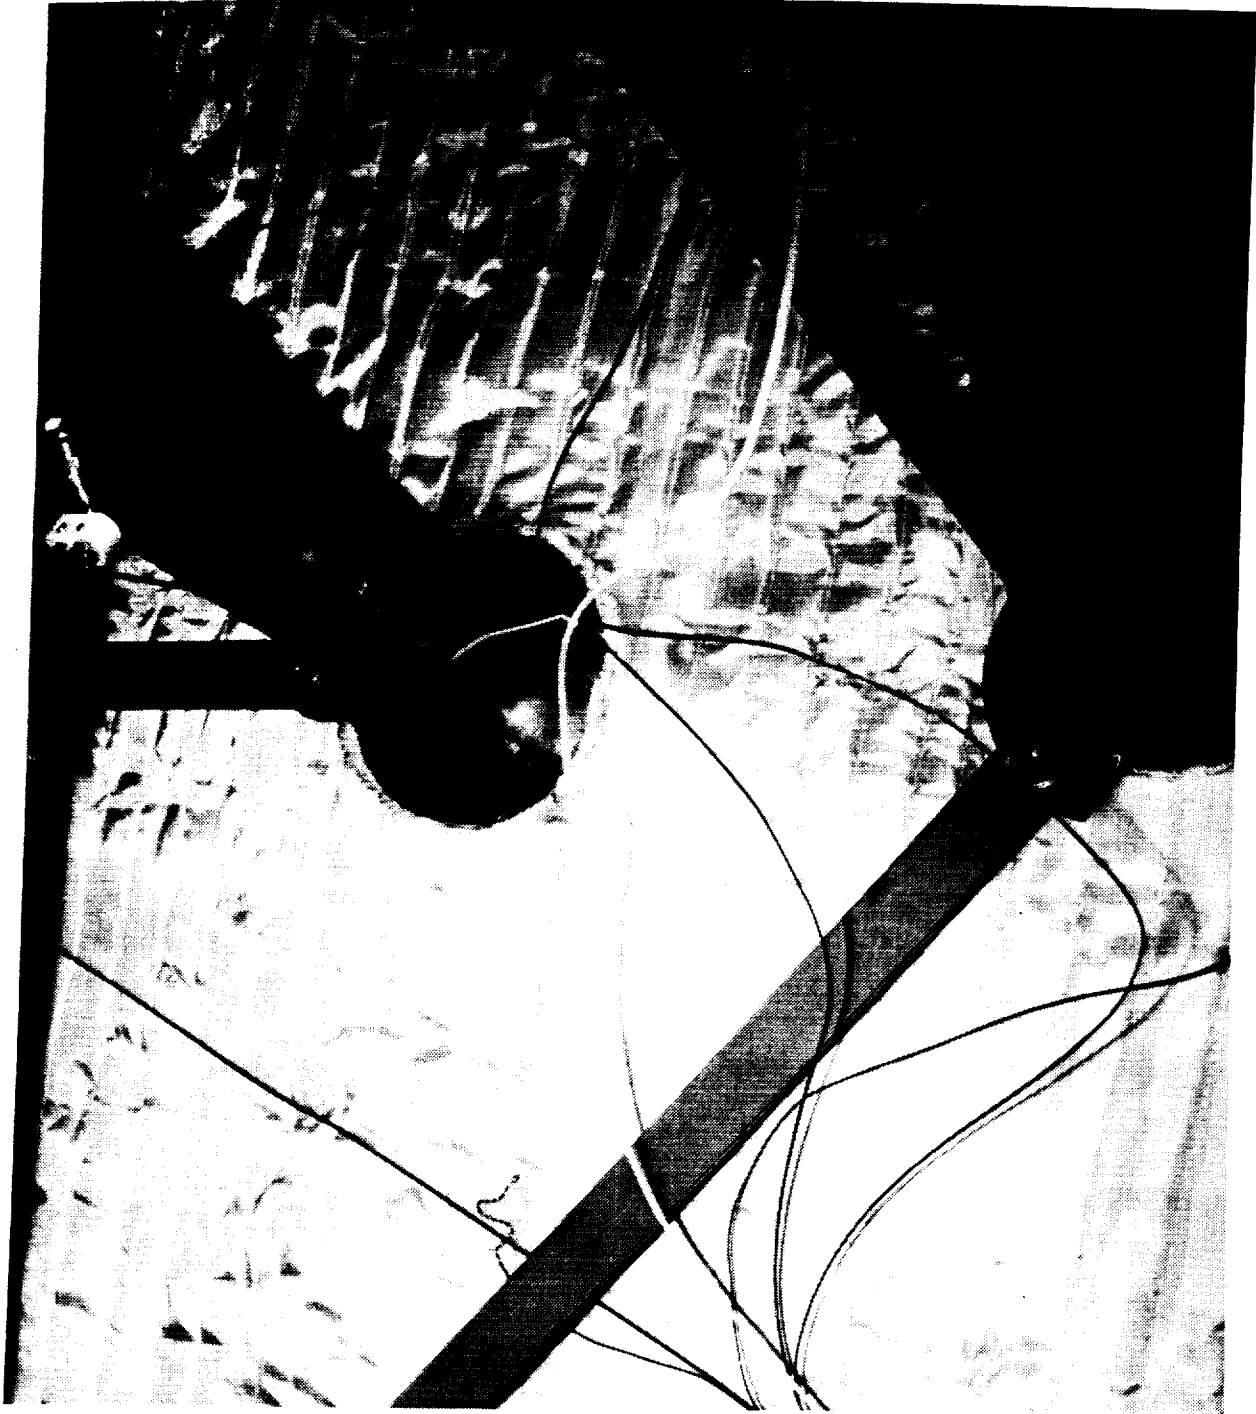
Welded Attachments of the Inlet and Exit Gas Lines to the Heat Receiver.
